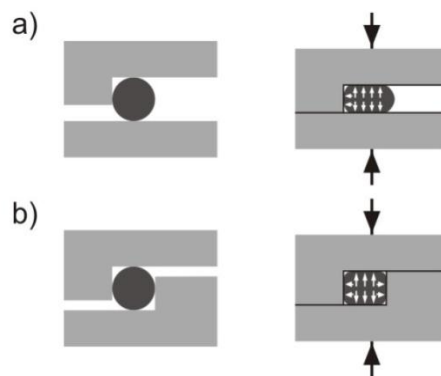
Step seals with O-ring: (a) single step; (b) double step
